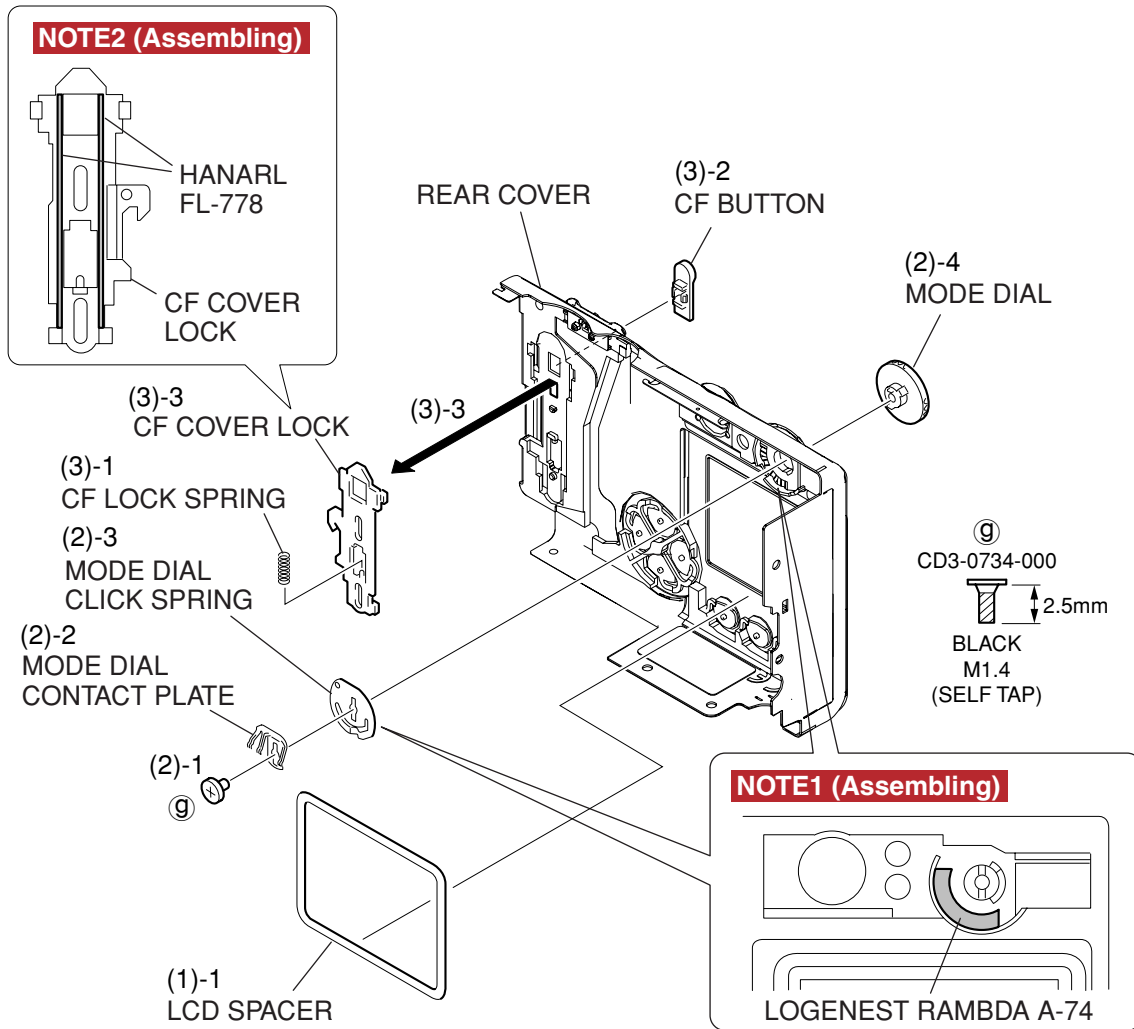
LCD SPACER, MODE DIAL, CF COVER LOCK
